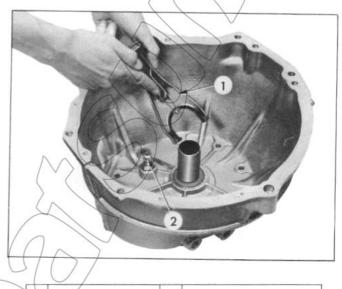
Position on the bearing sleeve to which grease is applied
